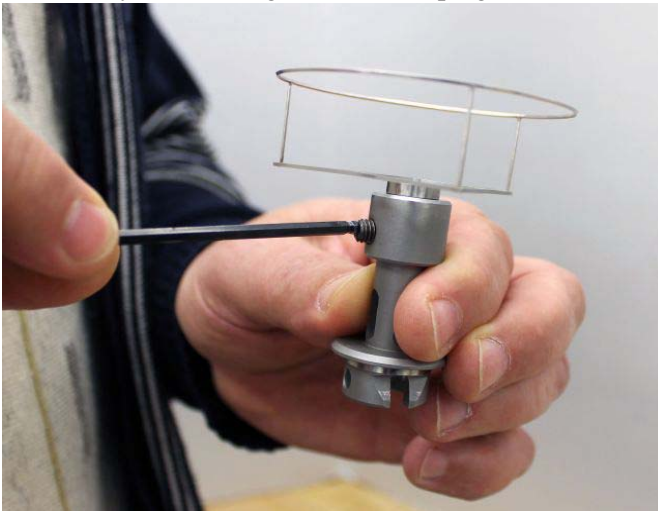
Tighten the hex screw to secure the ring in the adapter.
